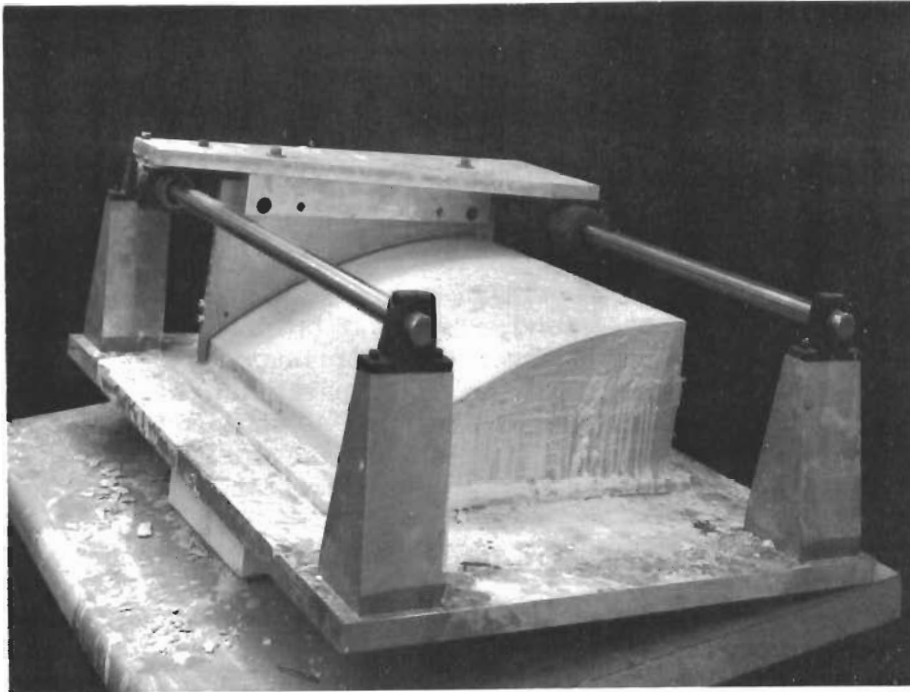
Sweep Fixture for Primary Shield Glass Rock Tool
